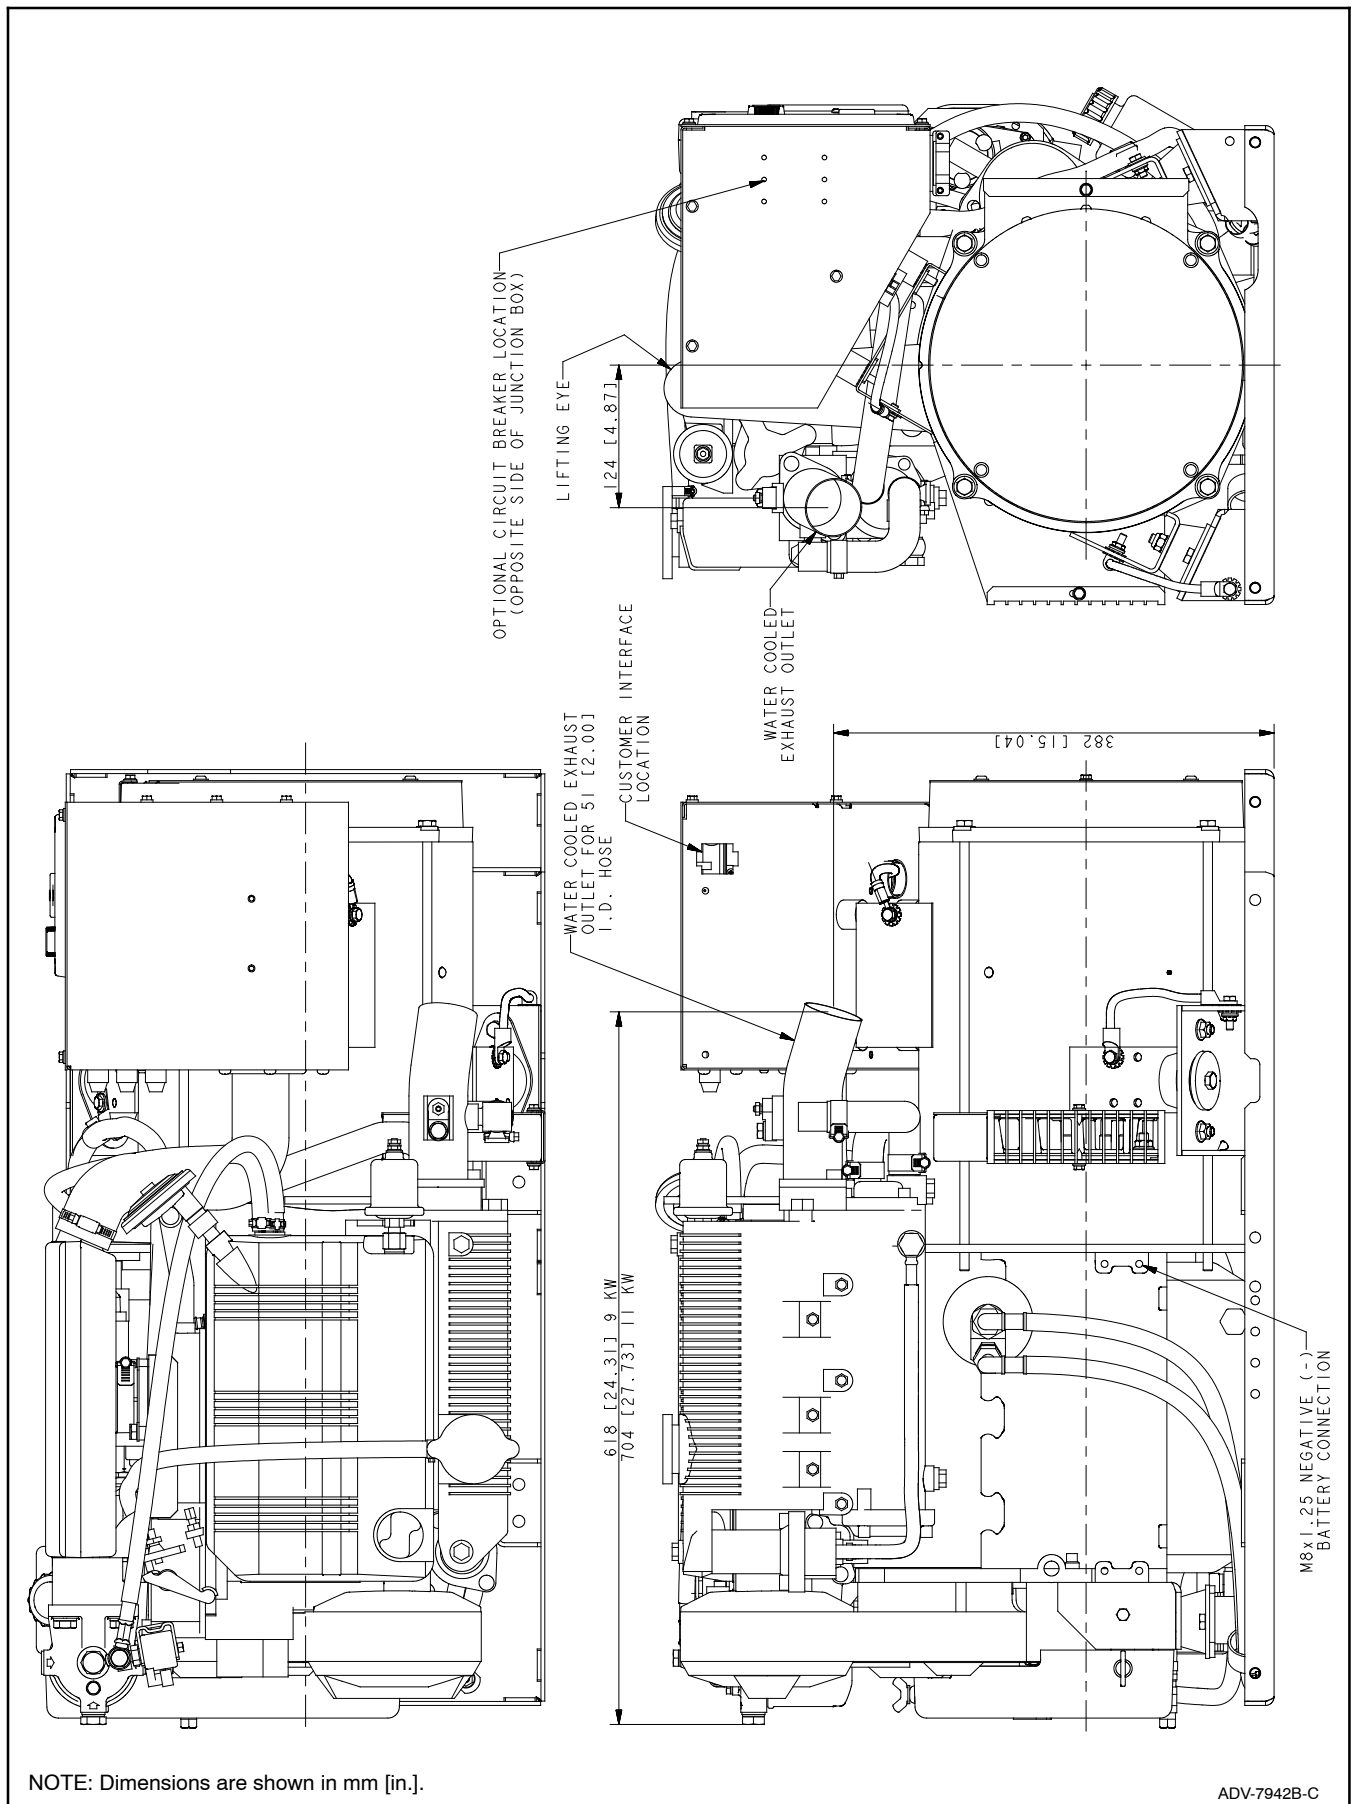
Dimension Drawing, 9-11EKOZD and 7-9EFKOZD (Sheet 2 of 2)
